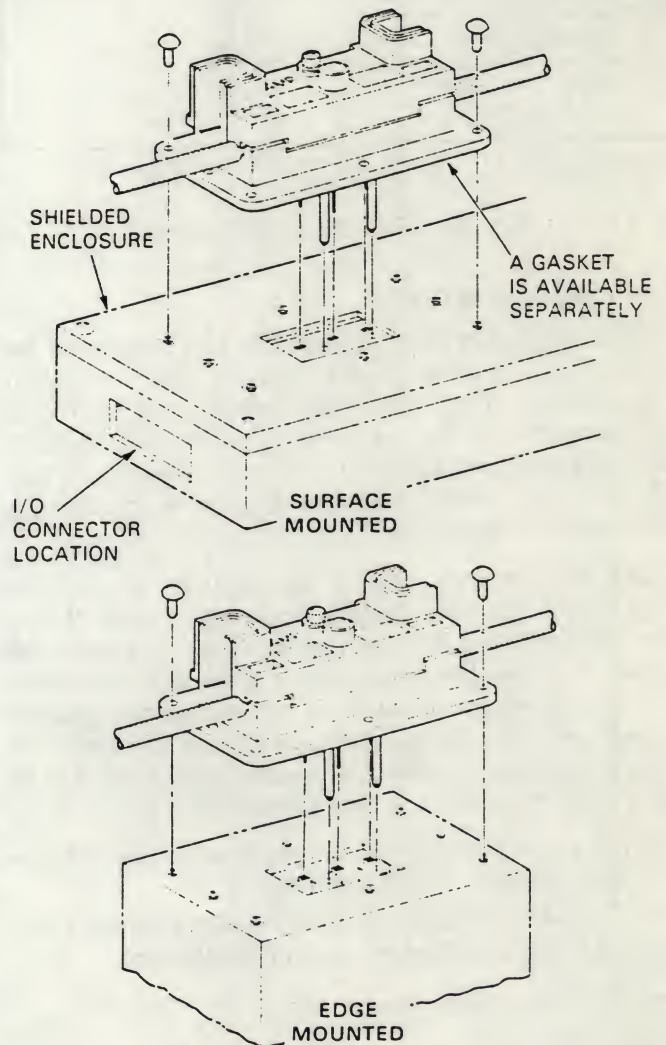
Surface-Mounted and Edge-Mounted PC Boards
